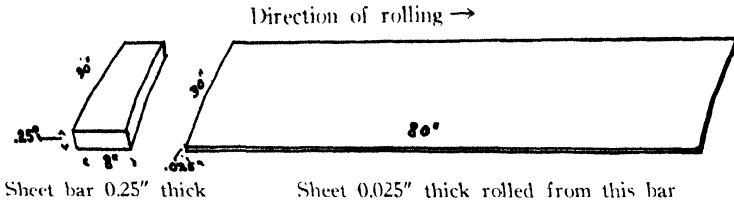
Sketch illustrating sheet sizes resulting from sheet bar.
